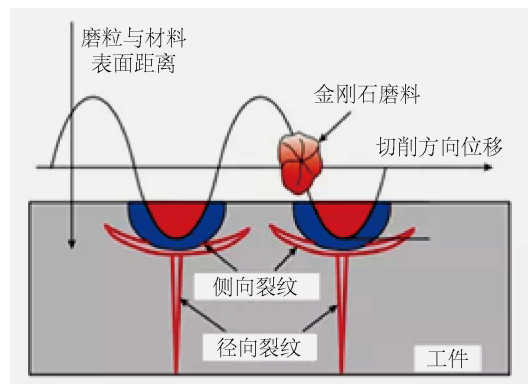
The abrasive trajectory and material removal mechanism of rotary ultrasonic machining
